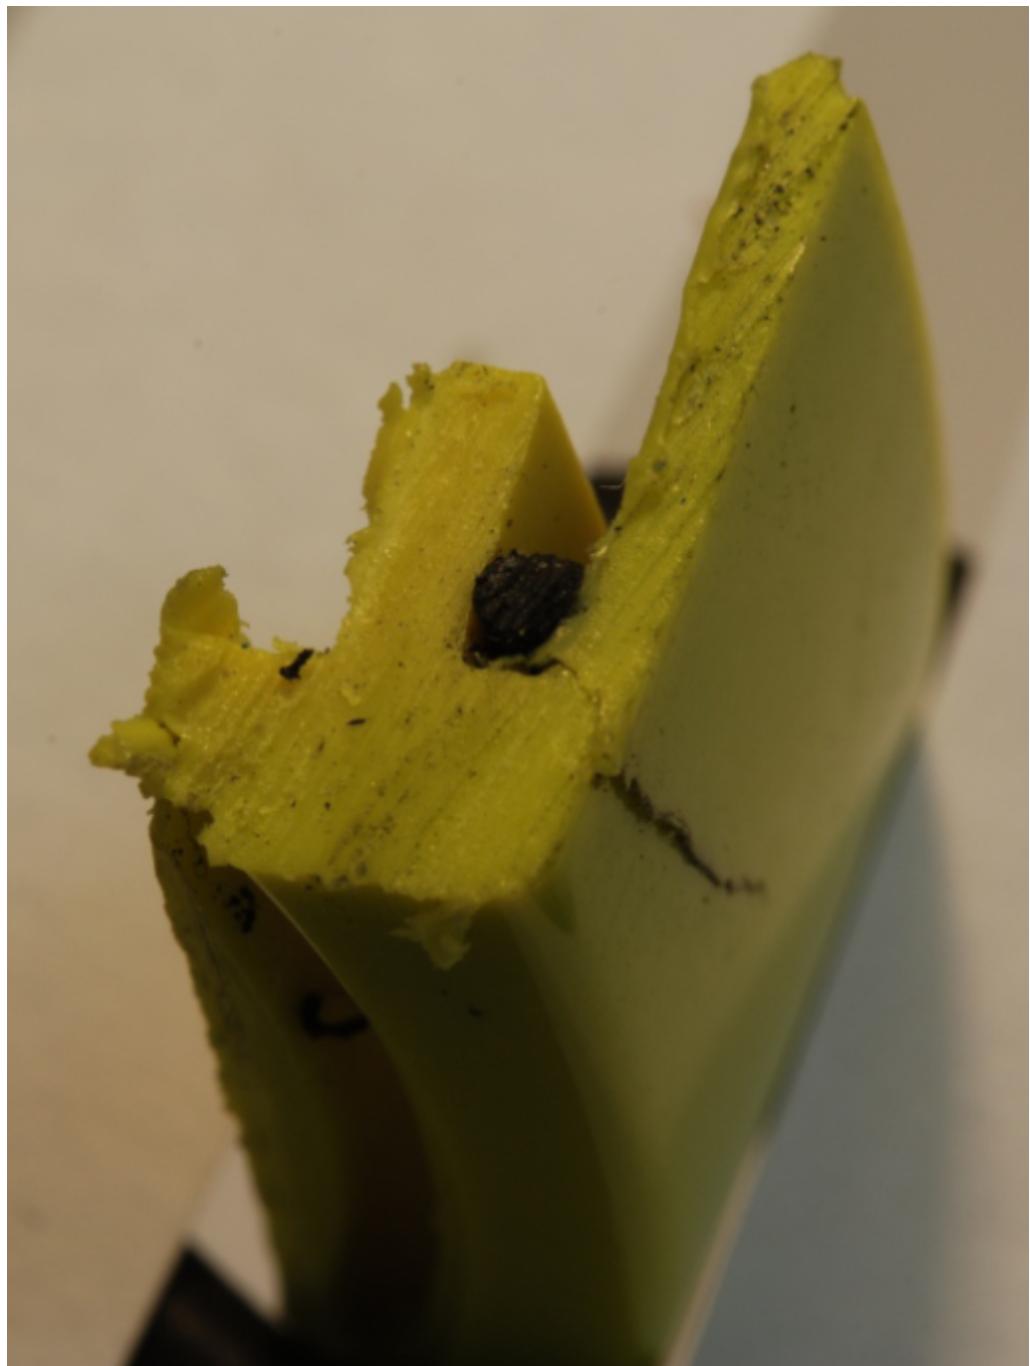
Cross section of crack in top cover. Cracking seen to initiate at root of groove where o-ring is
